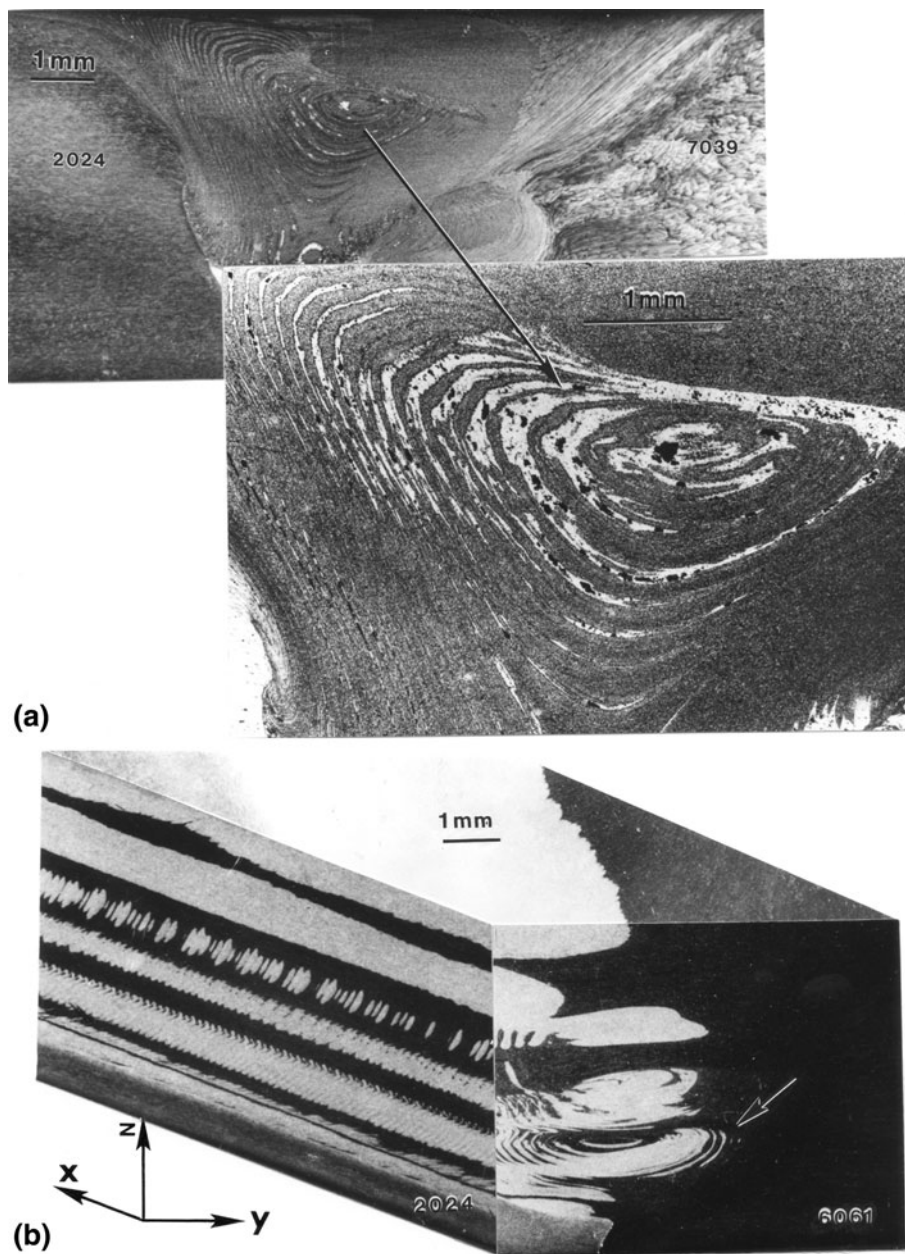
Complex, intercalation flow patterns in the weld zone for dissimilar metals FSW. (a) Onion-ring-vortex-like structure in Al 2024/Al 7039 weld zone (800 rpm-1 mm/s, clockwise; Al 2024 advancing side); after Ref 22. (b) 3D weld section view of intercalation flow patterns for Al 2024 welded to Al 6061 at 400 rpm (R), 2 mm/s (T); after Ref 14
